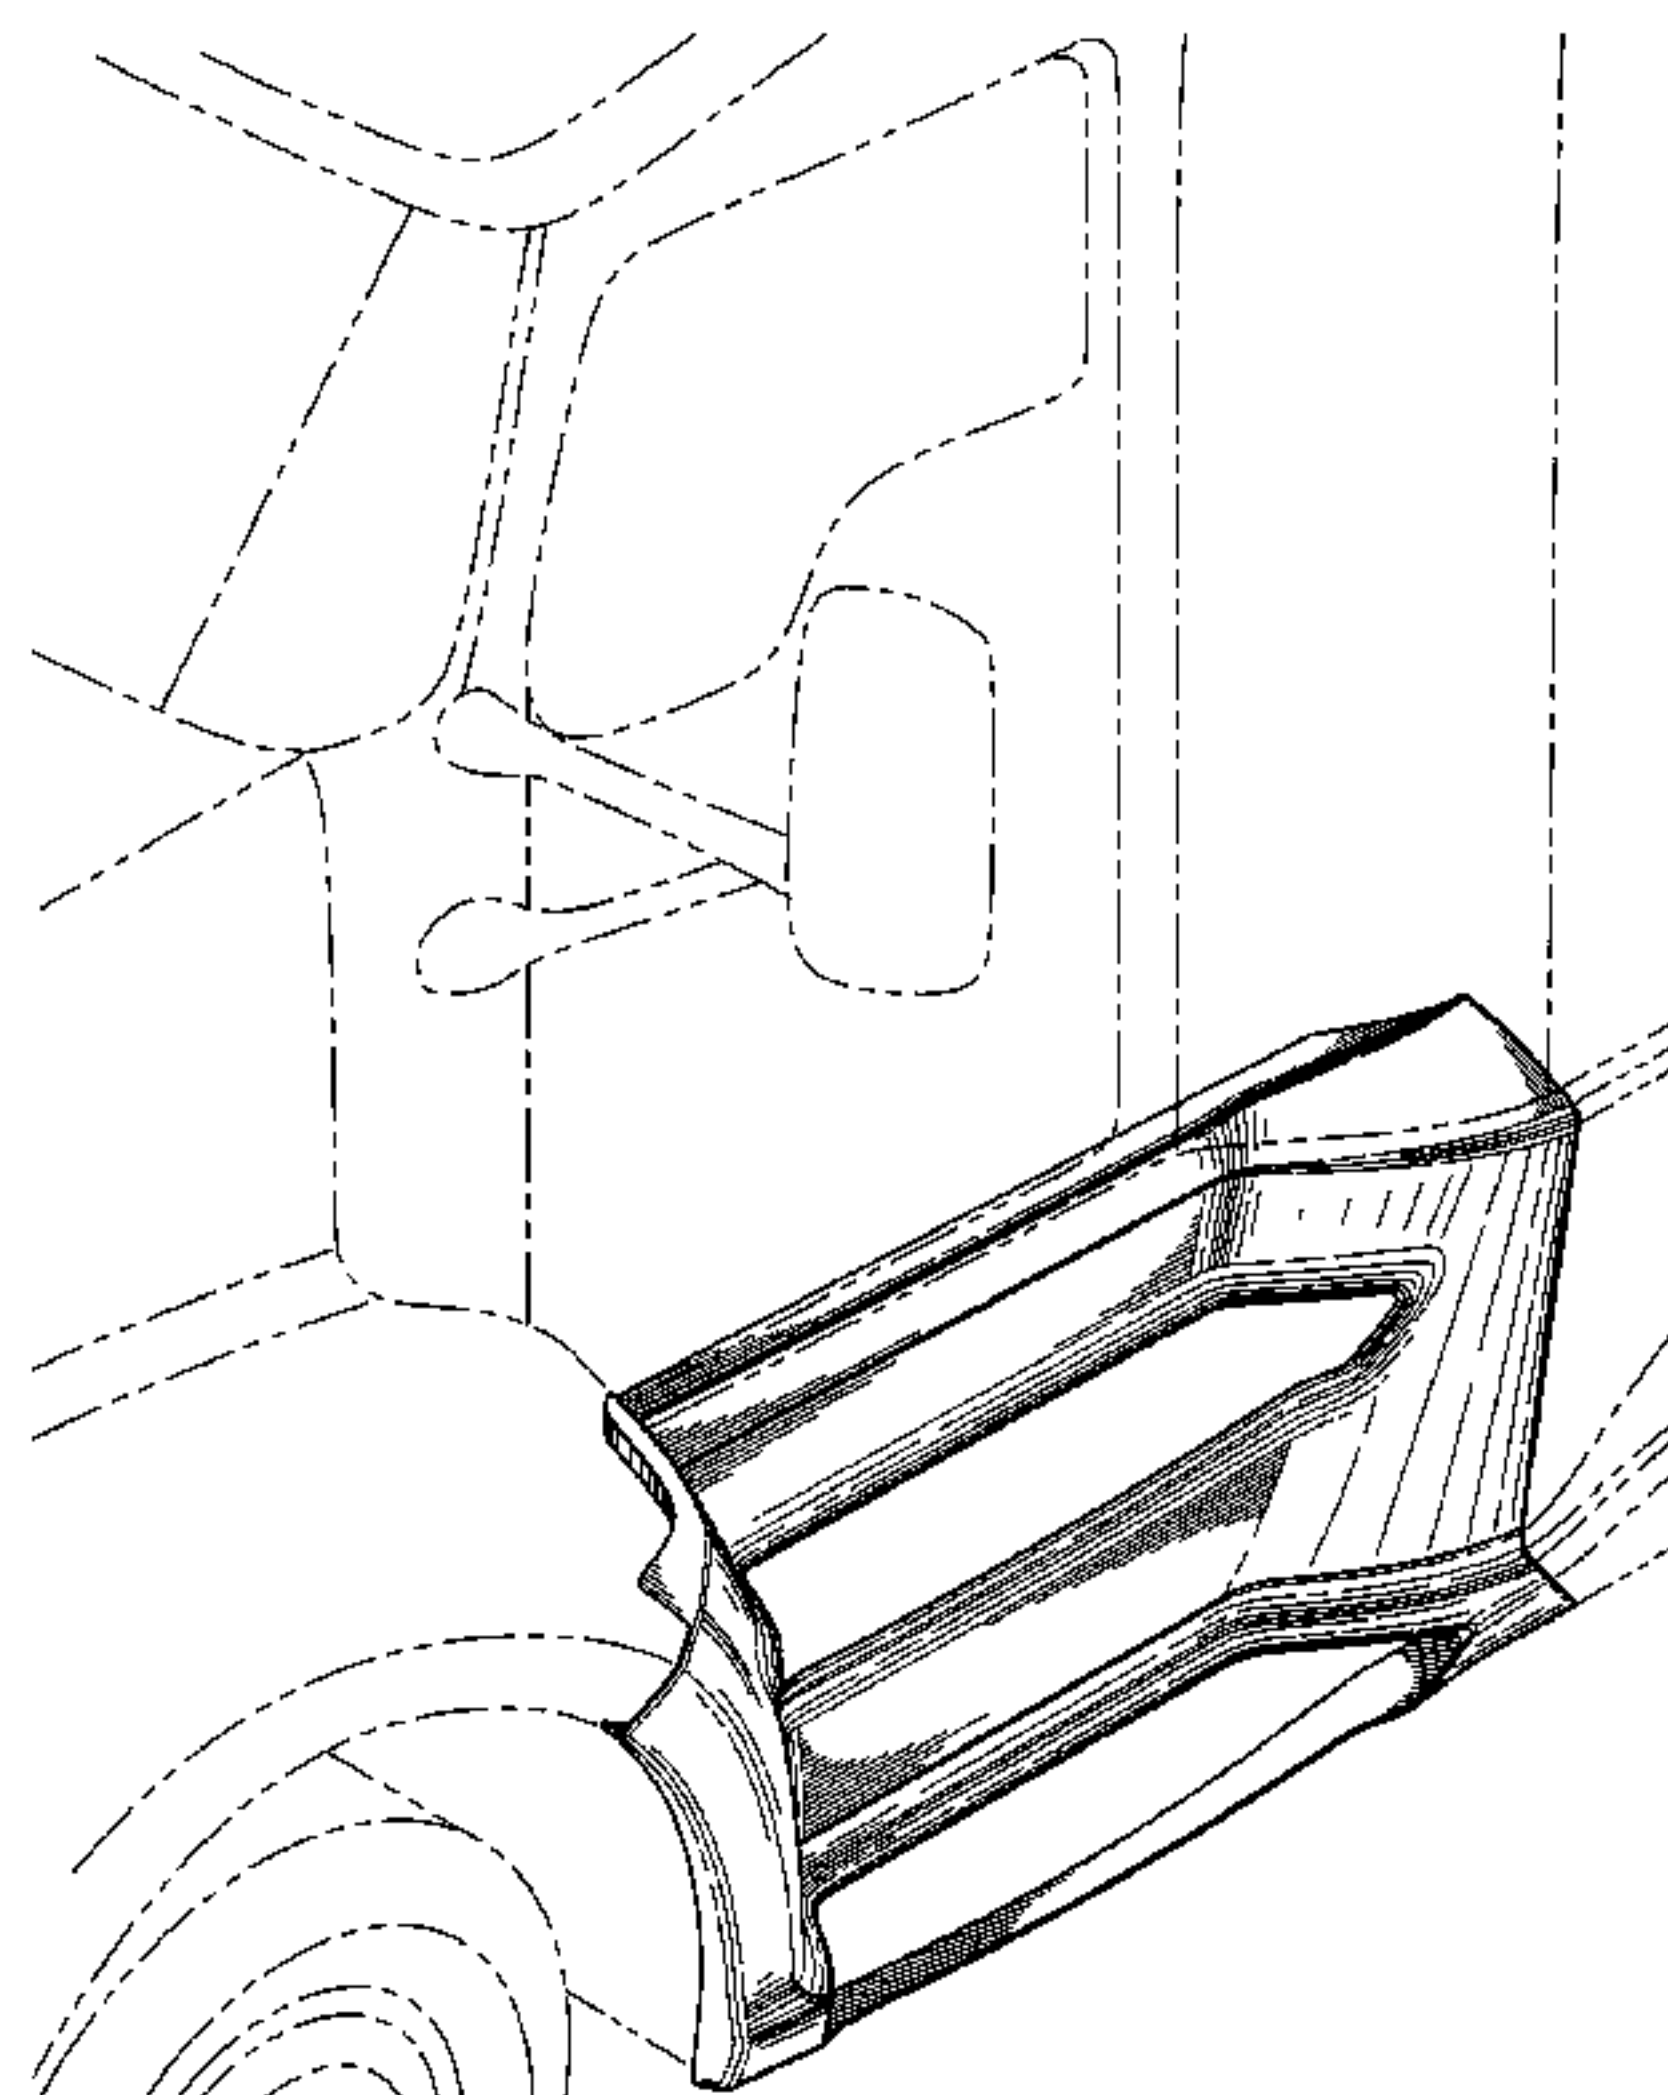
is a right side elevational view of the front chassis fairing for truck of FIG. 1; and,
